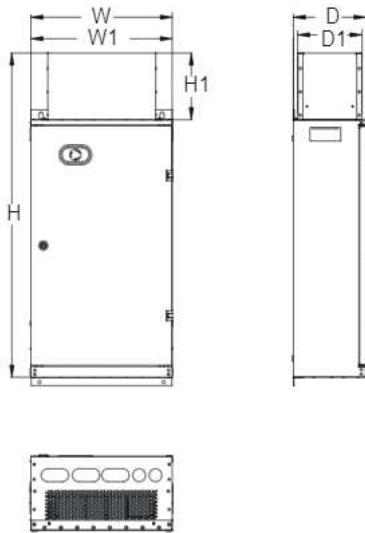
Overall dimensions - machine-room control cabinet (NICE3000B-4002 to NICE3000B-4015)
